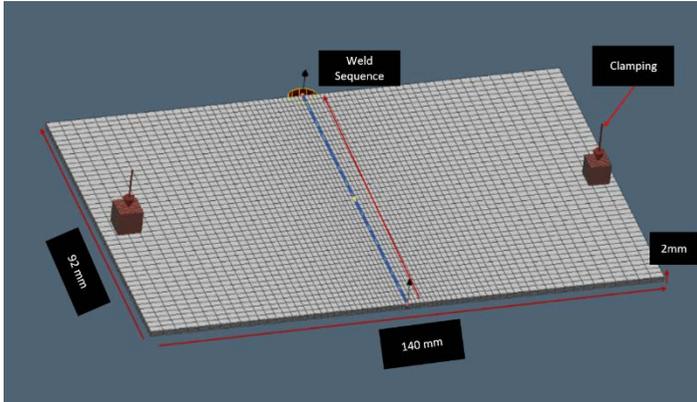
Details of butt-joint welding component displayed in Simufact.Welding.
